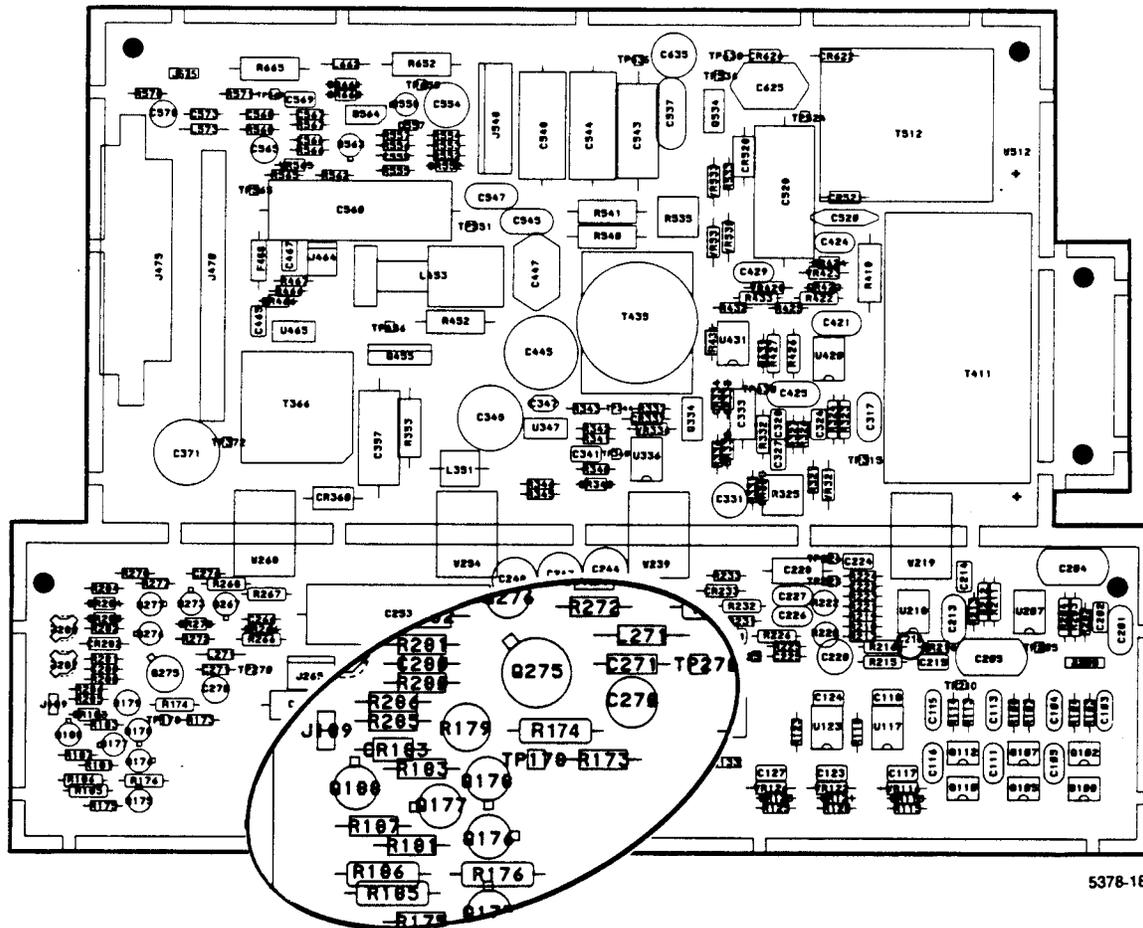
Expanded view of the CRT Drive Board shows components used in the External Trigger Adjust.
